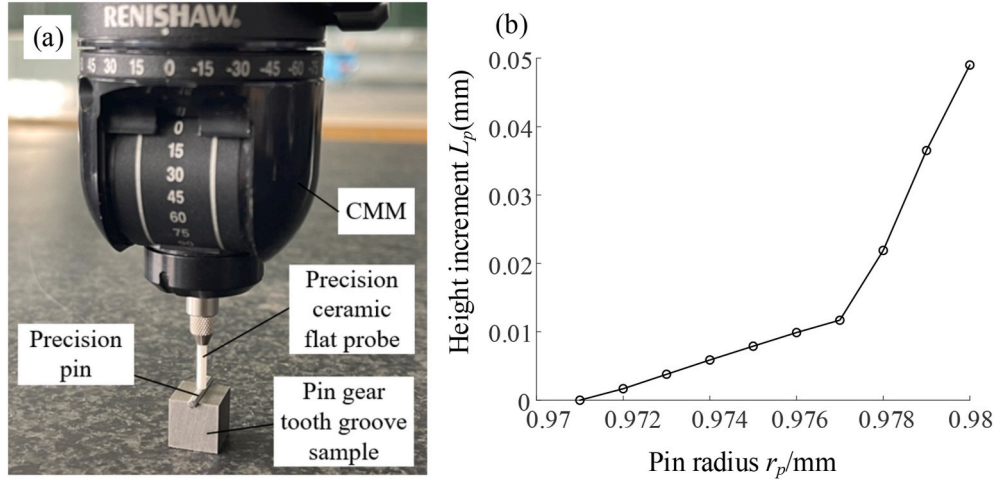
(a) pin gear tooth groove sample (b) pin assembly error measurement results.
